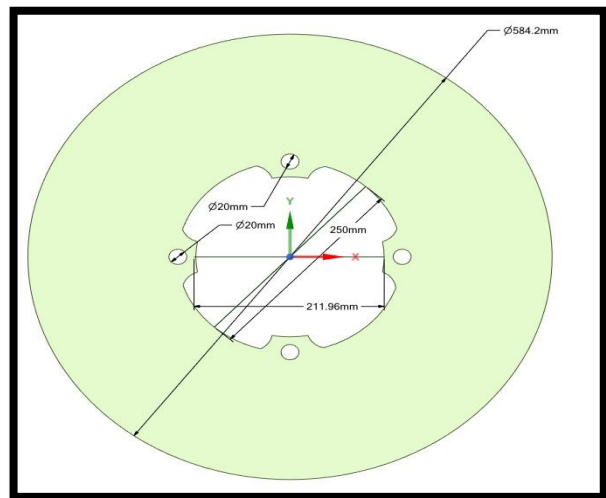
3D-Model of Non-Optimized Disc Rotor with Dimension
